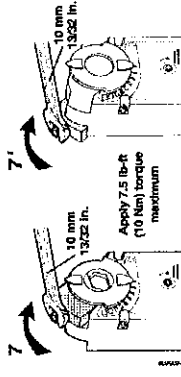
Fasten the Shaft Adapter to the Damper Shaft.
